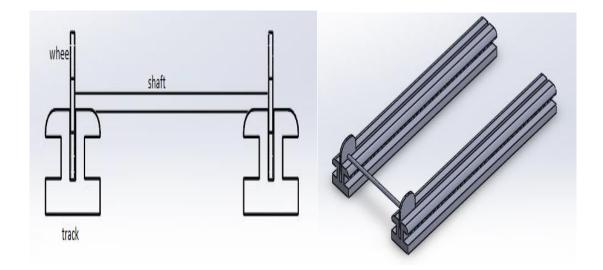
and 4.2.2 front view and isometric view of length movement
